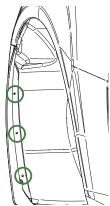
Removing the Wheel Well Cover to Bumper Cover Screws
